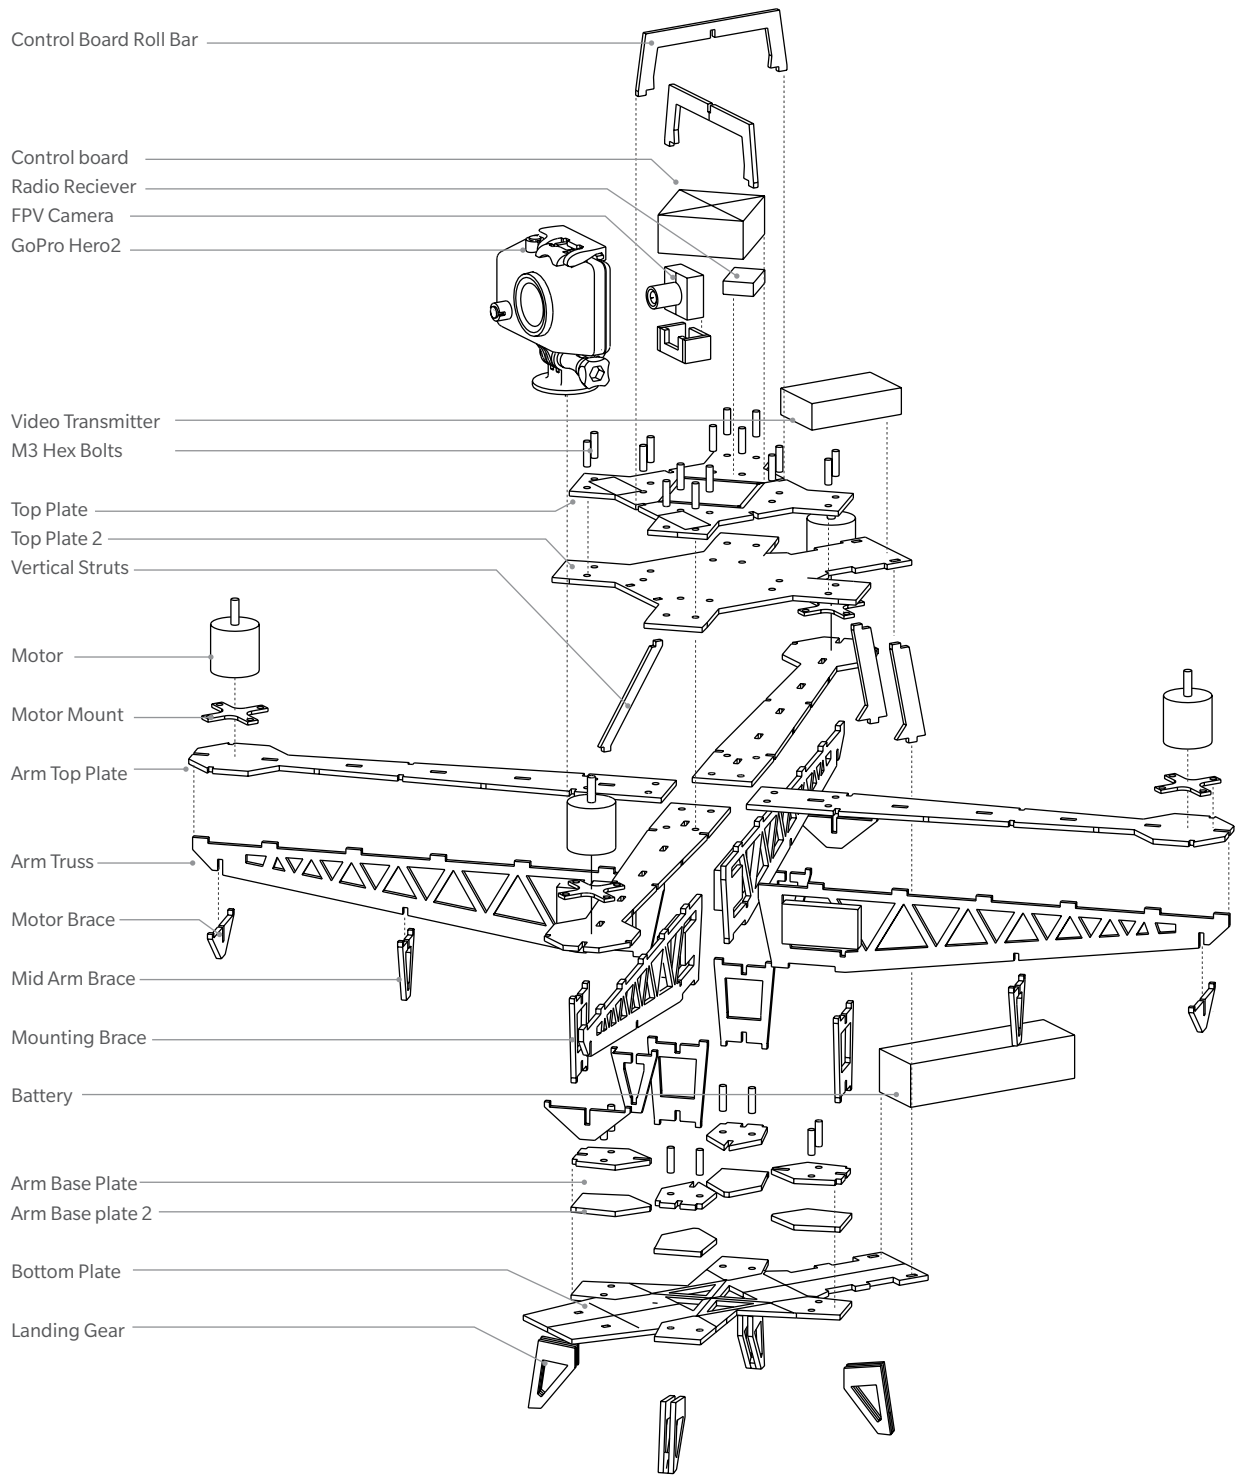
Quadcopter-03 Exploded Axonometric. *Drawing by Author.
